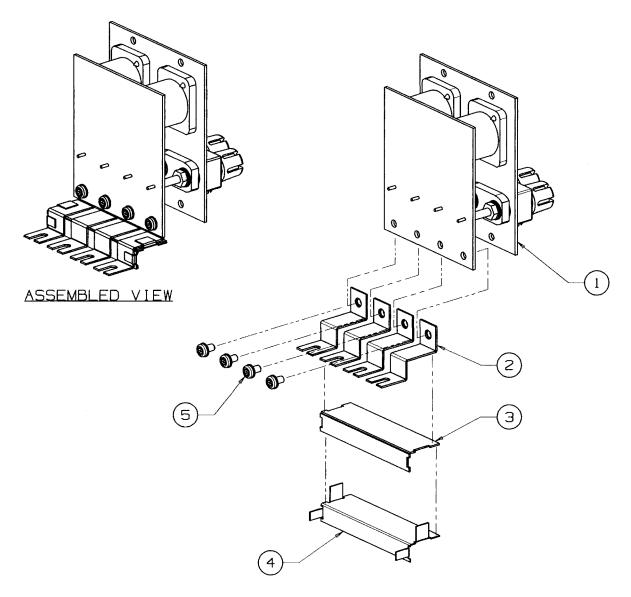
CE4000 Standard Domestic Output Assembly (Exploded View)
